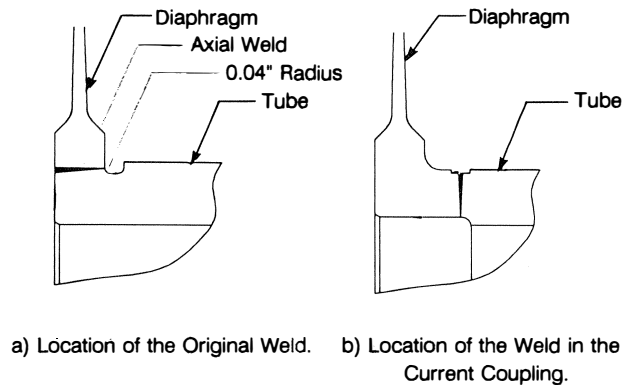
Location of the Coupling Diaphragm-to-Tube Weld Where the Failure Started.
